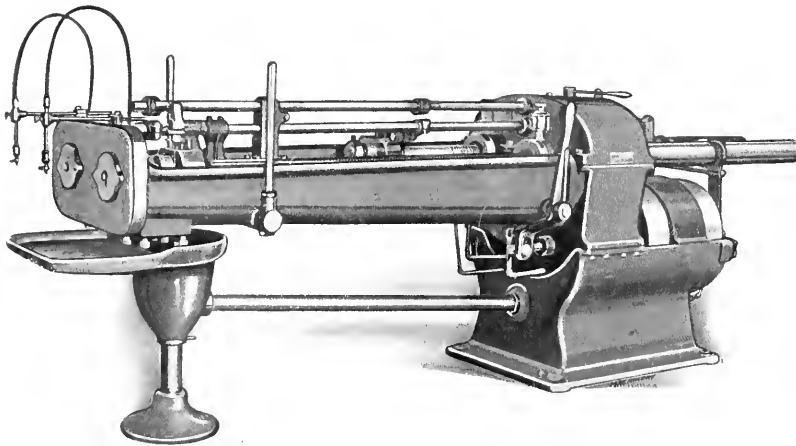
Front View of J. N. Lapointe Double Broaching Machine
